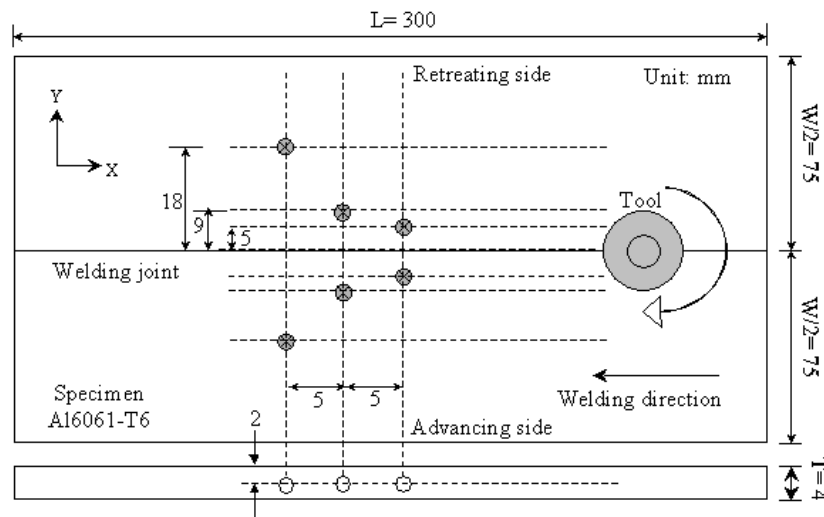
Workpiece dimensions and location of Thermocouples
